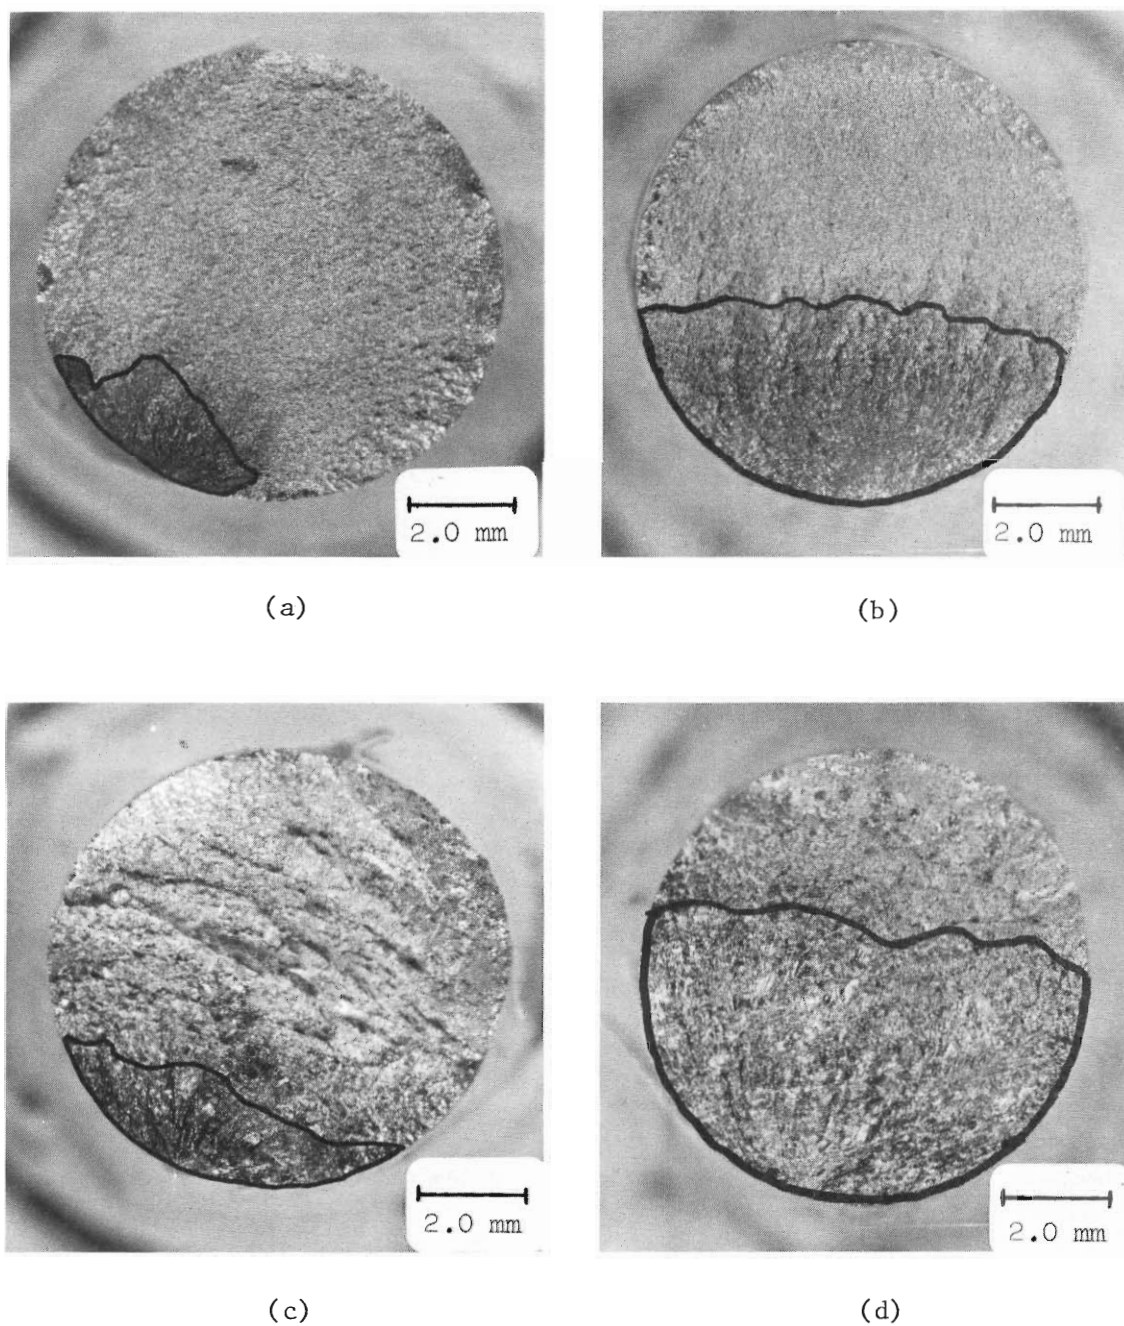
Optical Micrographs of Fractured 7050 HCF Specimens:
